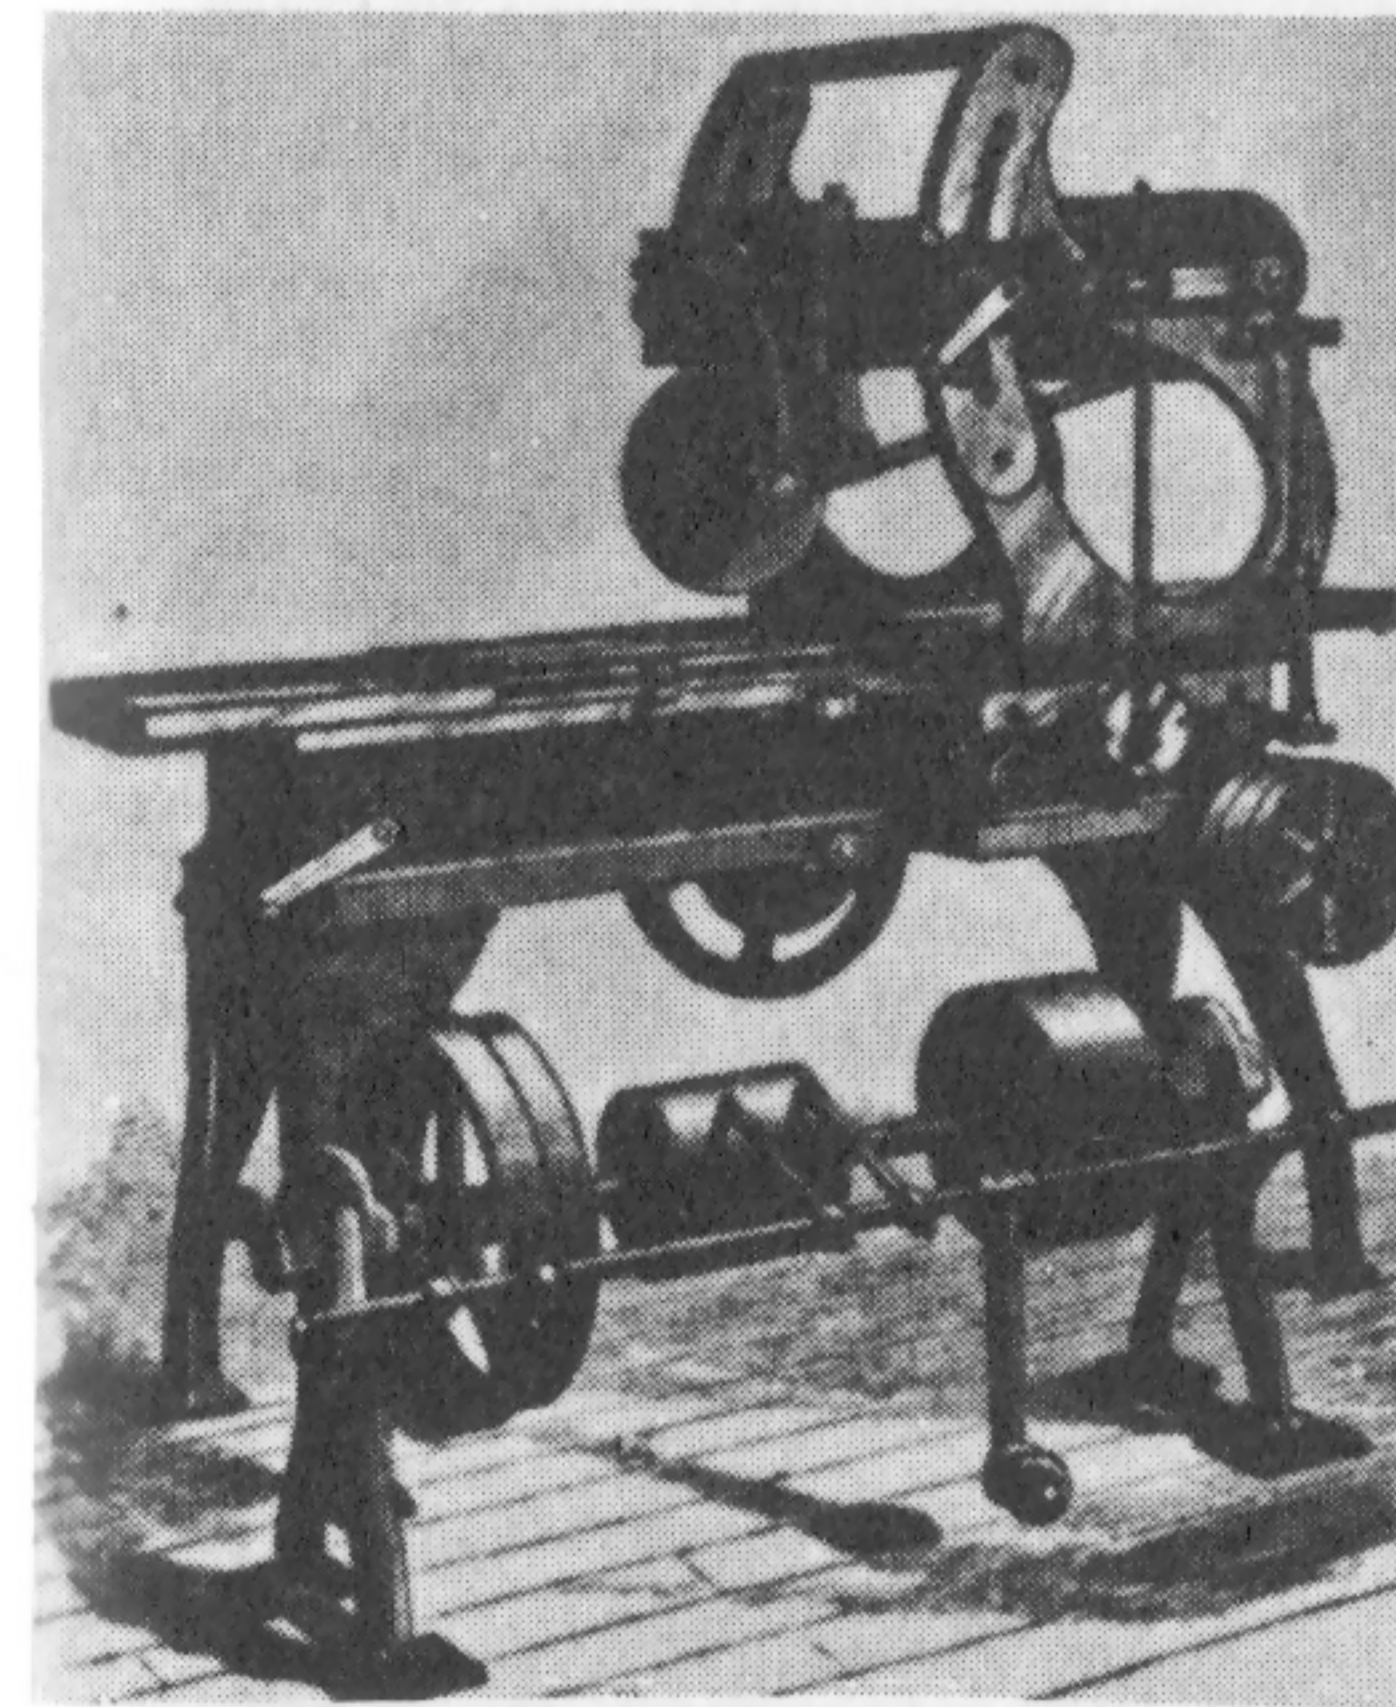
A PLANER-TYPE SURFACE GRINDING MACHINE, 1877
